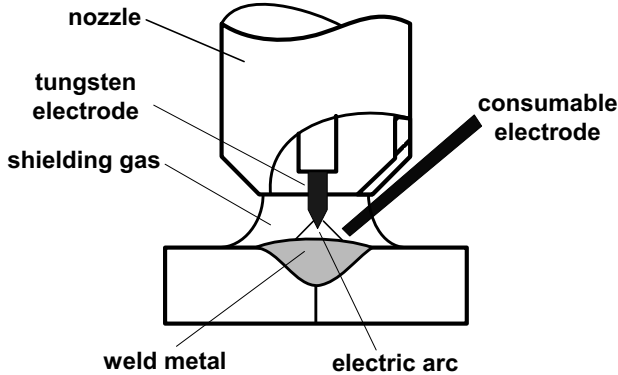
Diagrammatic sketch of the gas tungsten arc welding process (GTAW)
